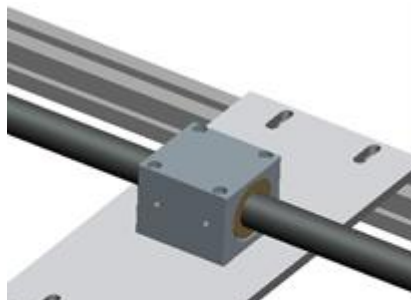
is a close up image of a single air bushing with the bushing block, bushing, and steel bar installed. There will be a total of 4 air bushings used in this design.
